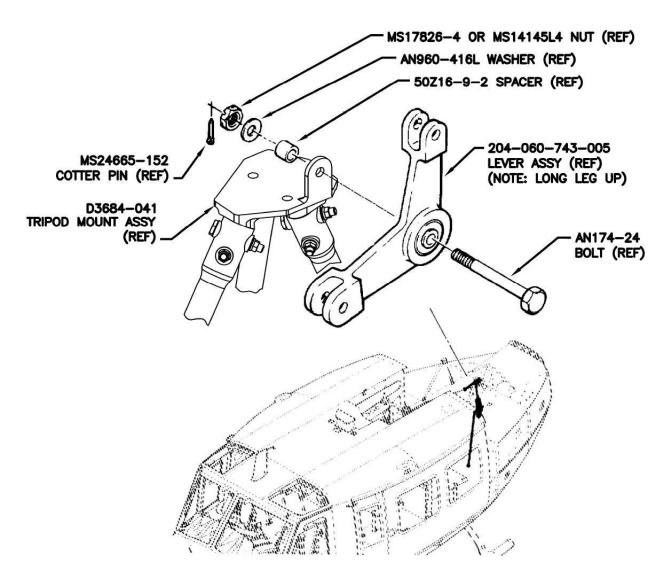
204-060-743-005 Lever Assembly Installation Detail
